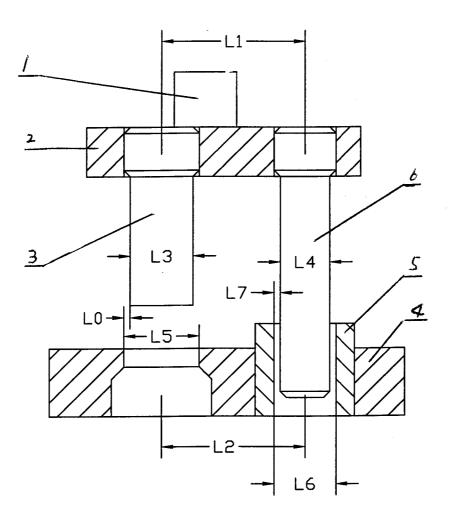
Assembly Drawing of Stamping Die (Example 3) (Note: 1— Holder, 2— Upper plate, 3— Punch, 4— Die shoe, 5— Guide bush, 6— Guide)
